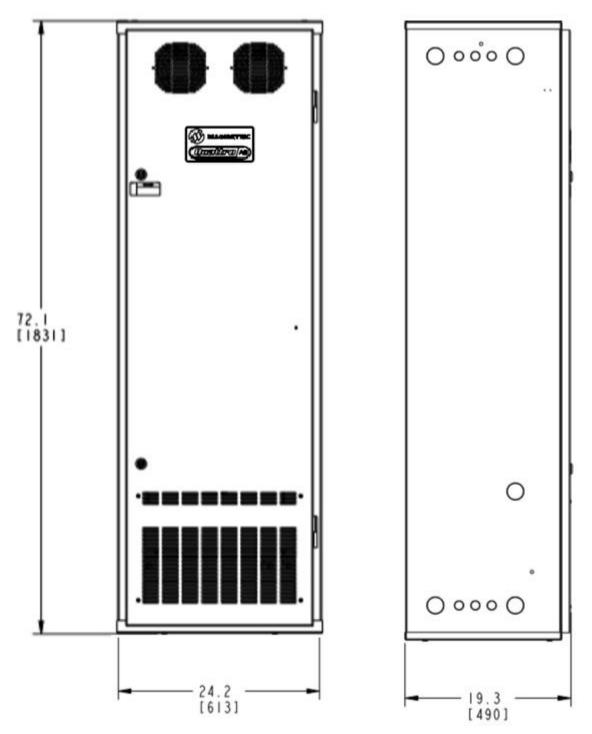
Dimensions without optional Customer I/O Panel (Enclosed)
